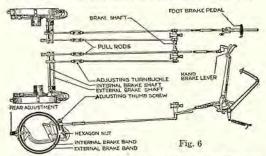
Brake connections where rods connect the footbrake pedal and hand-brake lever with external and internal bands. The foot pedal operates the external brakes, and the hand lever operates the internal brakes. Note that an internal brake band with a toggle action is shown.
